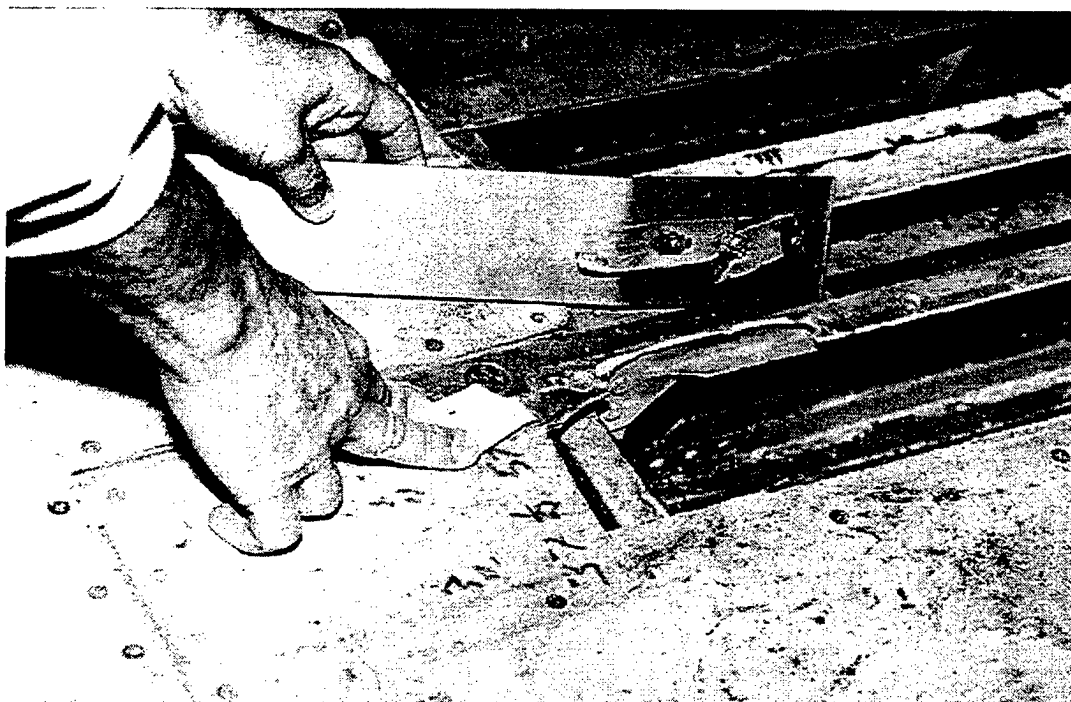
POSTTEST AUXILIARY FUEL TANK LOWER RIGHT BRACKET
